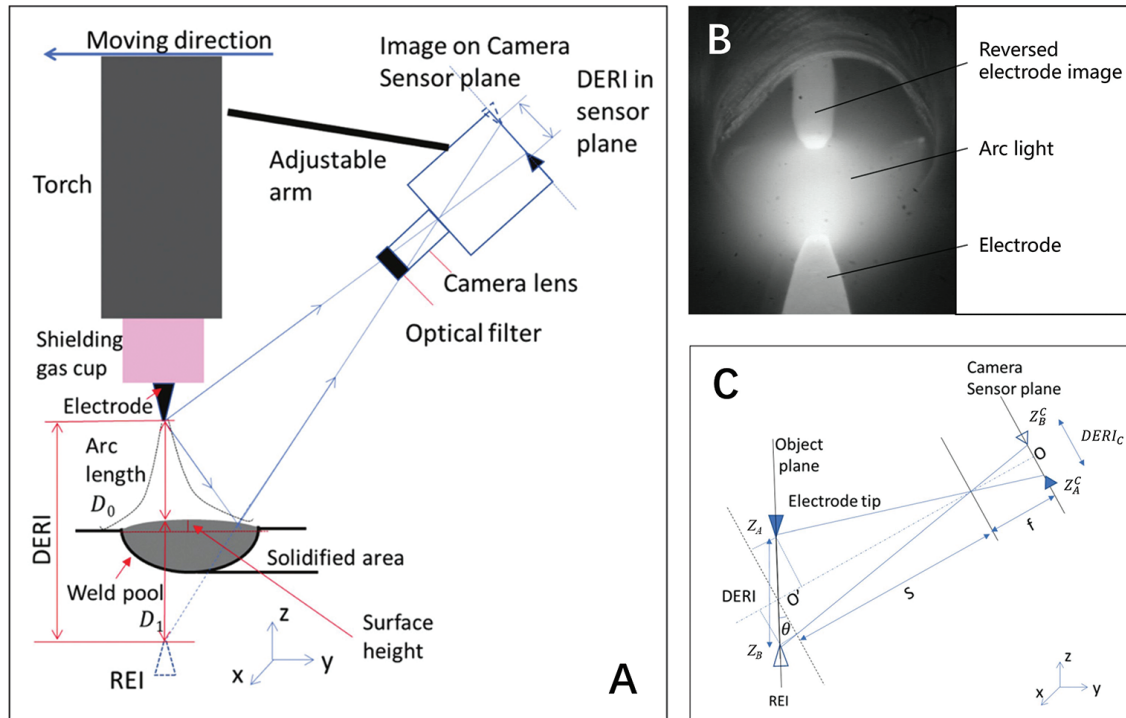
A – Diagram of passive vision monitoring system (Ref. 7); B – passive vision image of weld pool during GTAW; C – schematic of the pinhole camera model (Ref. 7).
